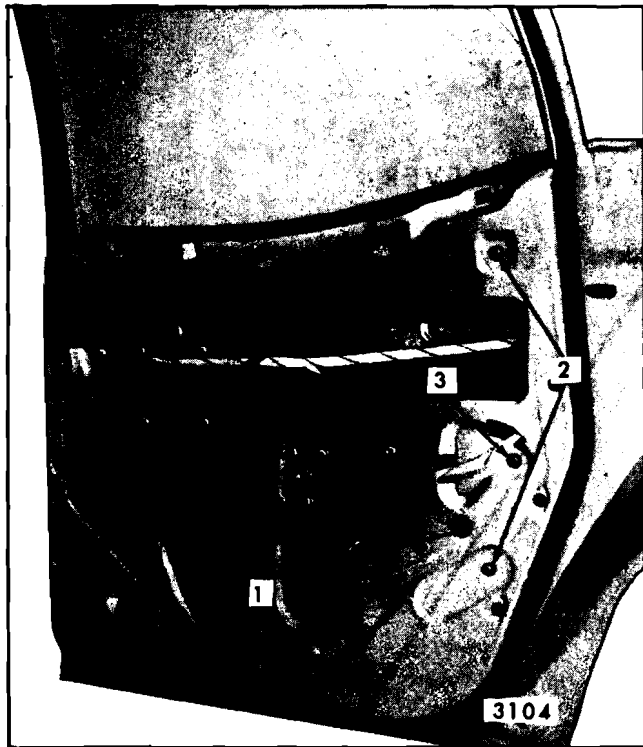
Rear Door Window Removal and Adjustments - "A" Closed Styles
